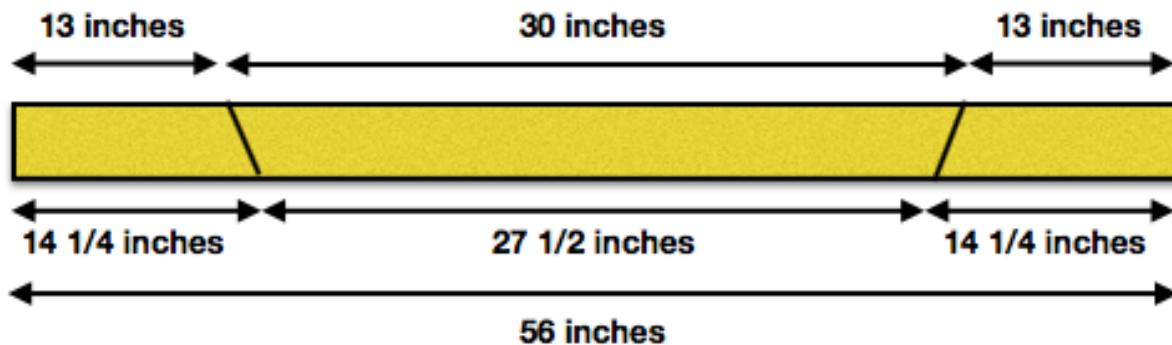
Cut the base legs from a 56-inch long part of a 2x4. The two angle cuts of the 2x4 are measured and cut with a circular saw. Three pieces are cut from this board, two identical side pieces and the long cross piece. After assembly, this will be a 30 inch cross.
